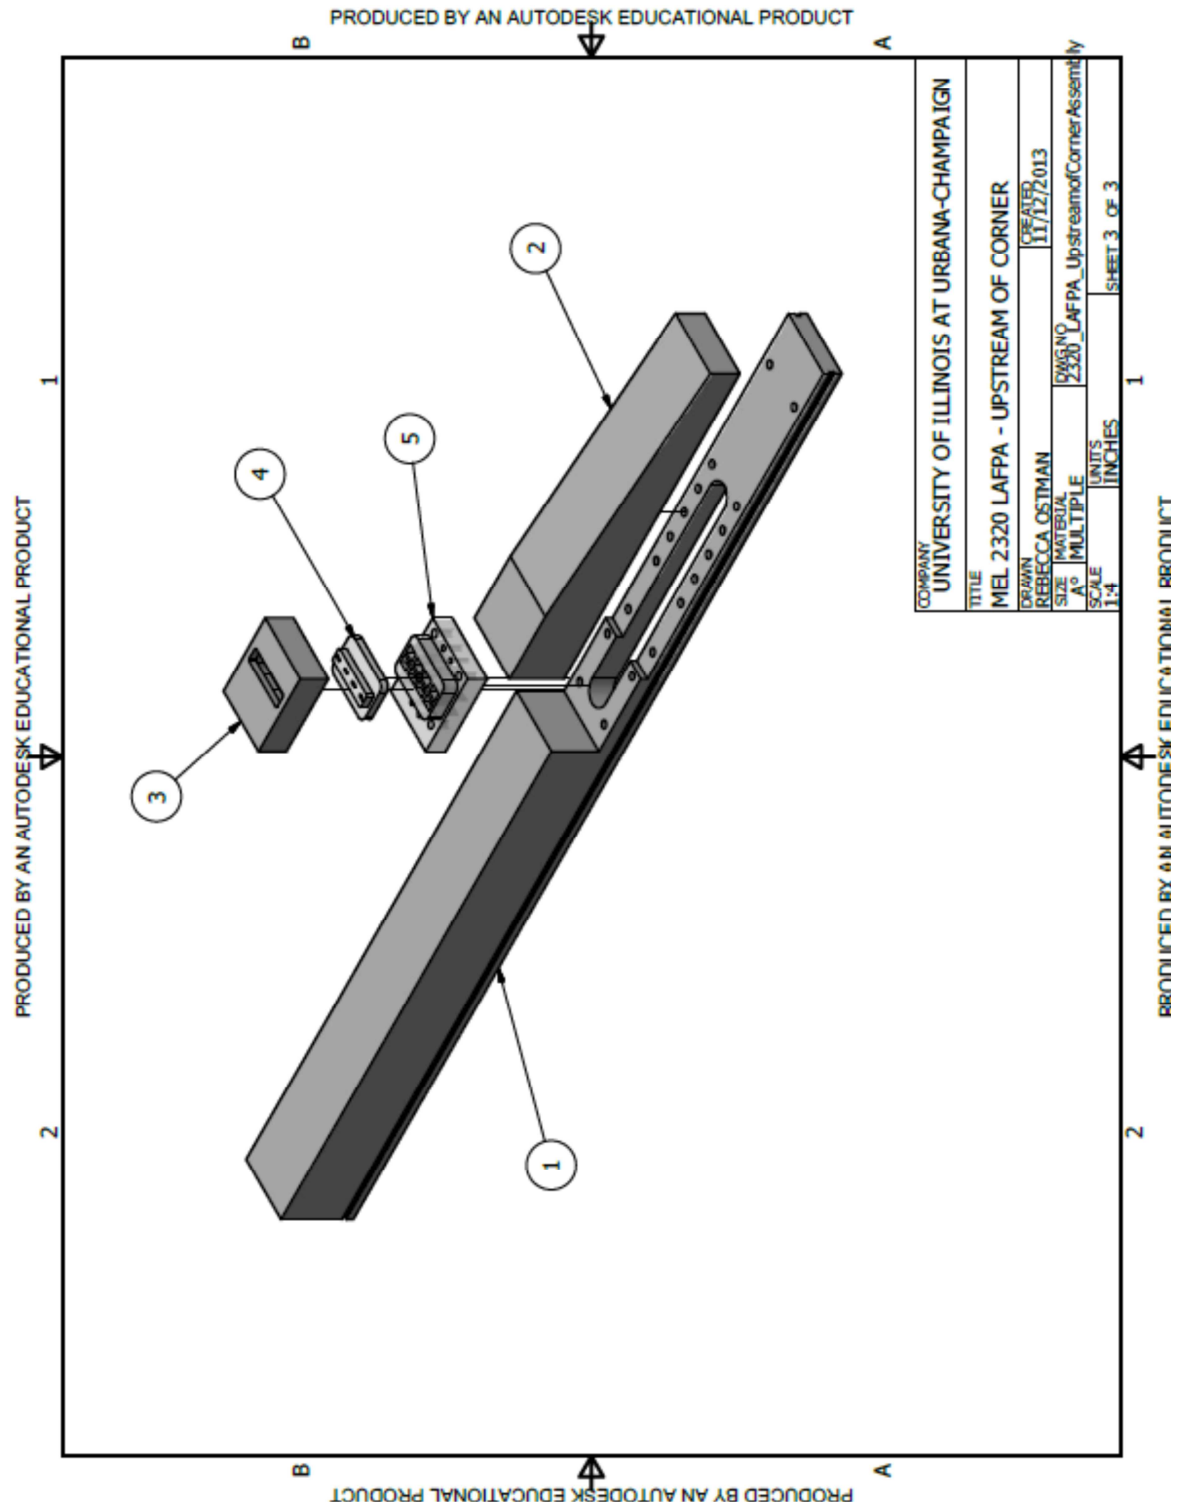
(cont.) c) exploded view of LAFPAs upstream of ramp corner assembly.
